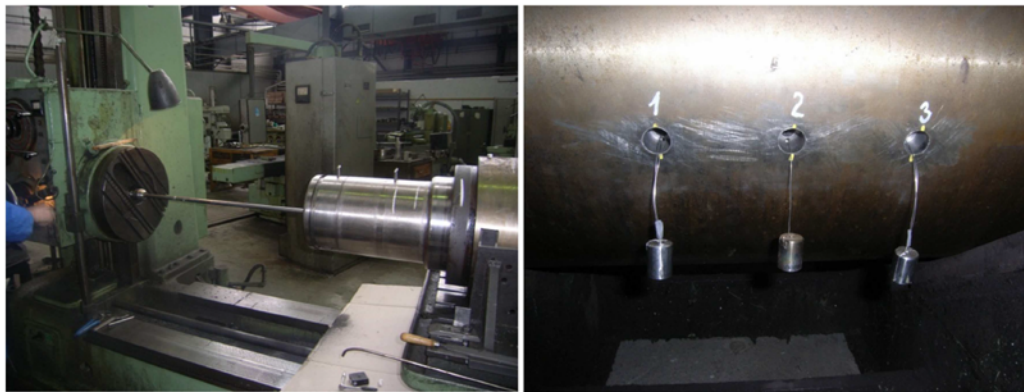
Drilling of hole in roll axis and sensors prepared for installation
